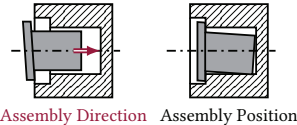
Deviated Pin in the Hole: The nominal Assembly Direction may lead to implausible Part Positions
